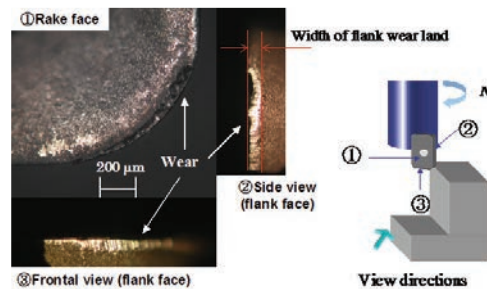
Cutting edge at a cutting length of 3750 mm for dry up-cut
